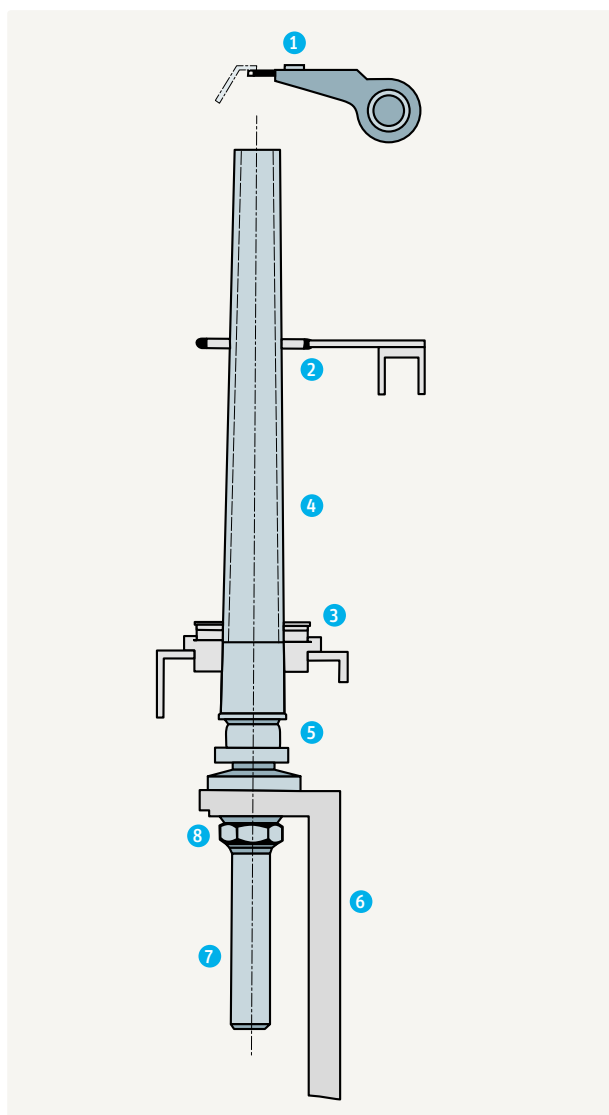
Thread guide eyelet (1), balloon checking ring (2), spindle (4/7) and ring (3)
